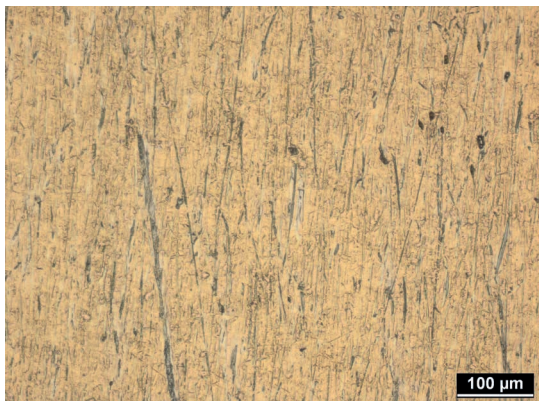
Scratched ENIG surface due to missing paper spacers when packaging the circuit boards
